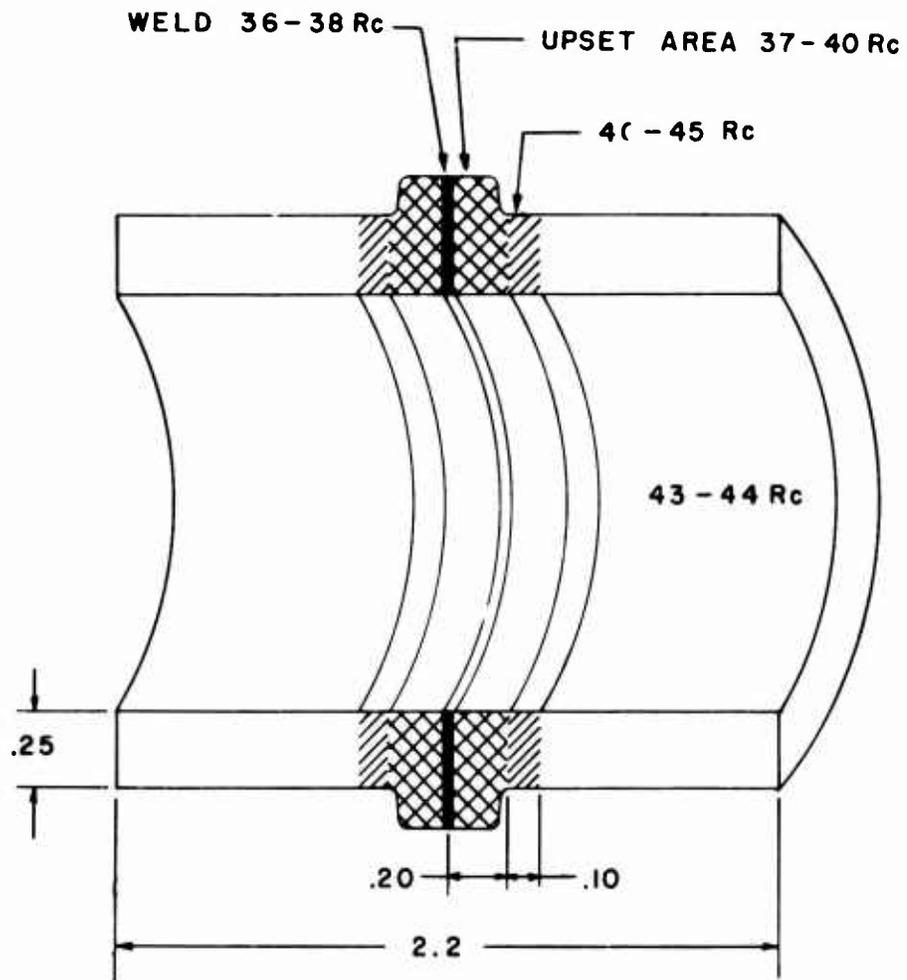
CROSS SECTION OF PRESSURE-WELDED CYLINDER SHOWING HARDNESS IN WELD AREA
